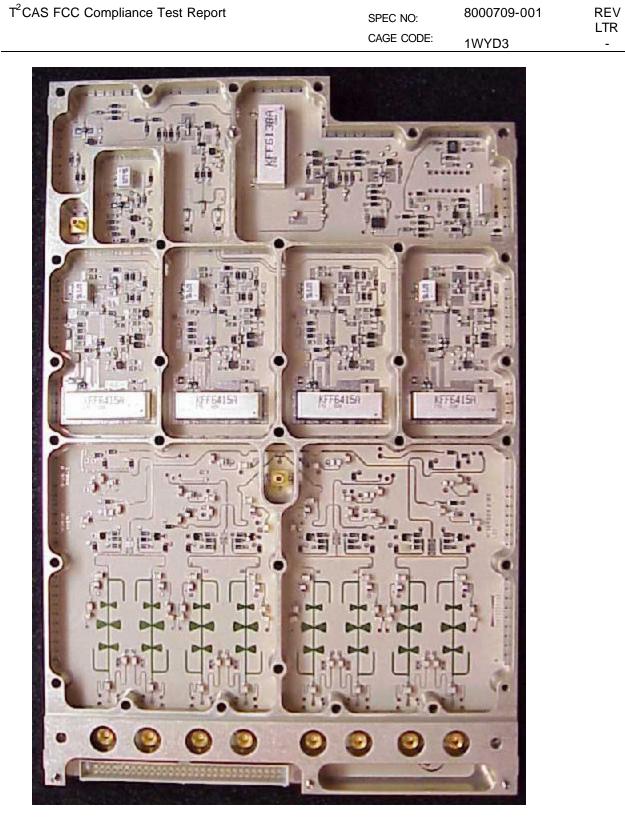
View of A5 Receiver – I/O Assembly with Cover Removed. Side B
